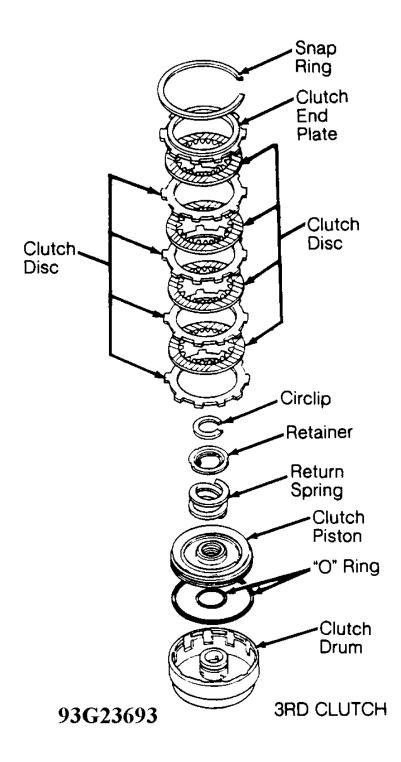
Exploded View Of 3rd Clutch Assembly Courtesy of AMERICAN HONDA MOTOR CO., INC.
